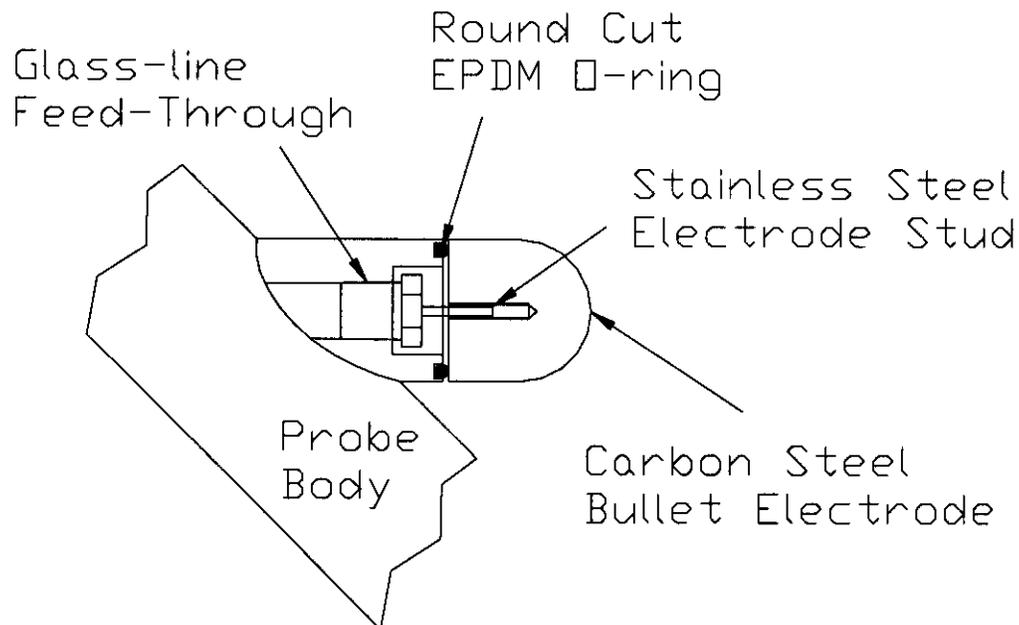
Round cut O-ring gasket design for sealing surface used on 241-AN-105 probe
